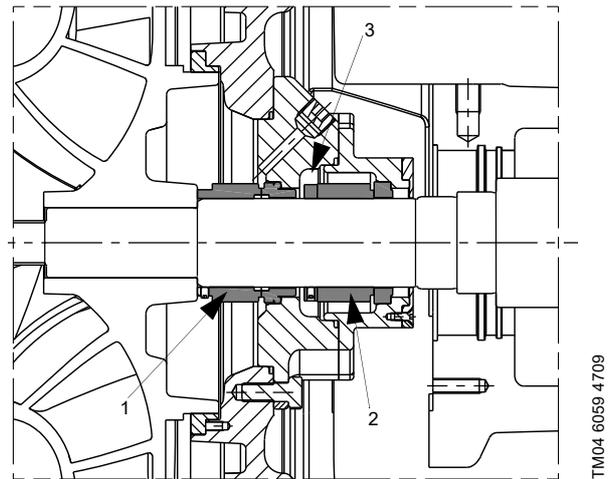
Tandem seal arrangement consisting of two shaft seals
